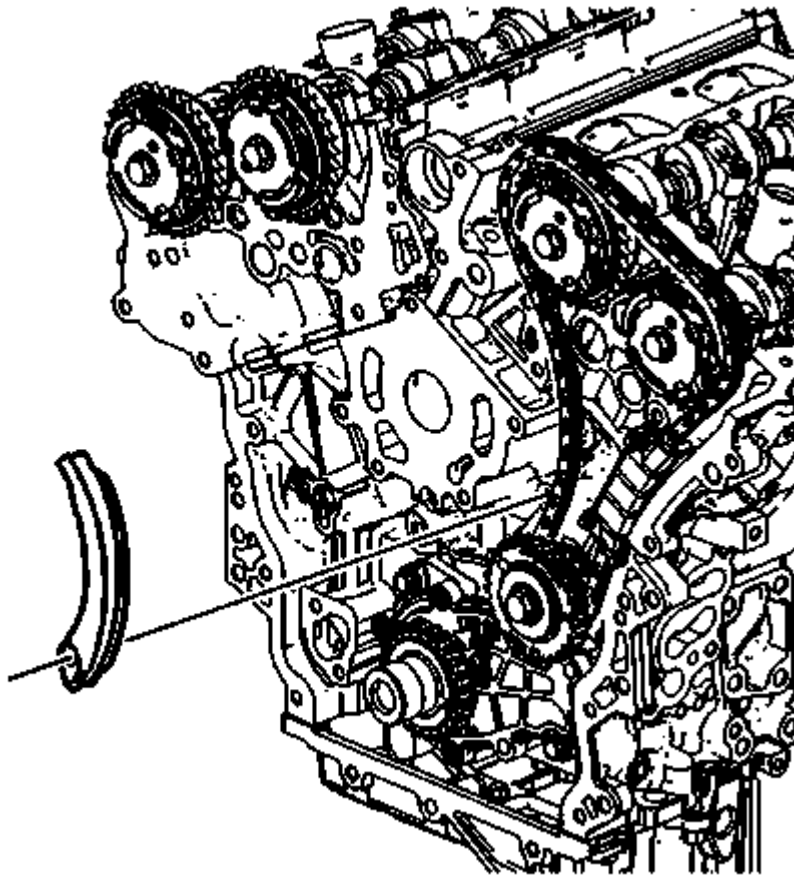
View Of Left Secondary Camshaft Drive Chain Shoe
